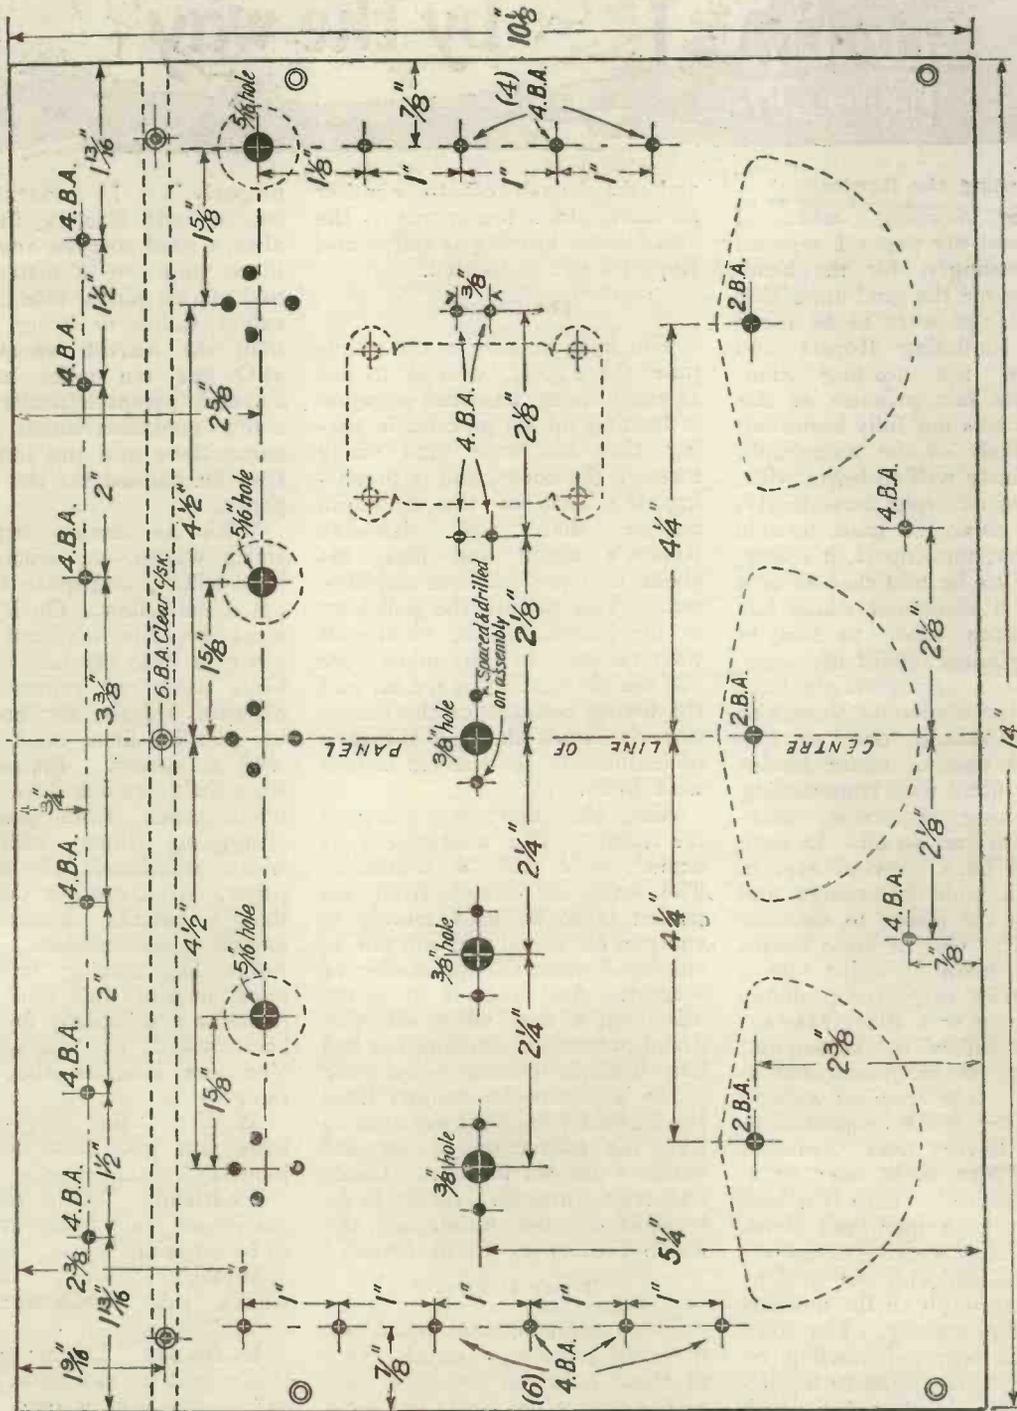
Drilling diagram of the front panel. This drawing is made exactly half-size so that the constructor obtains his dimensions and marks off his panel by means of a pair of dividers.
